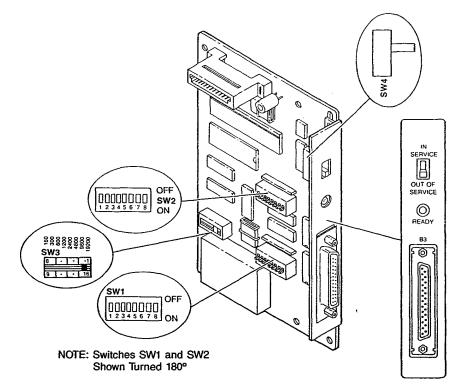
C-SMDR-SA PCB ASSEMBLY FOR UMT-8/16 INSTALLATION
